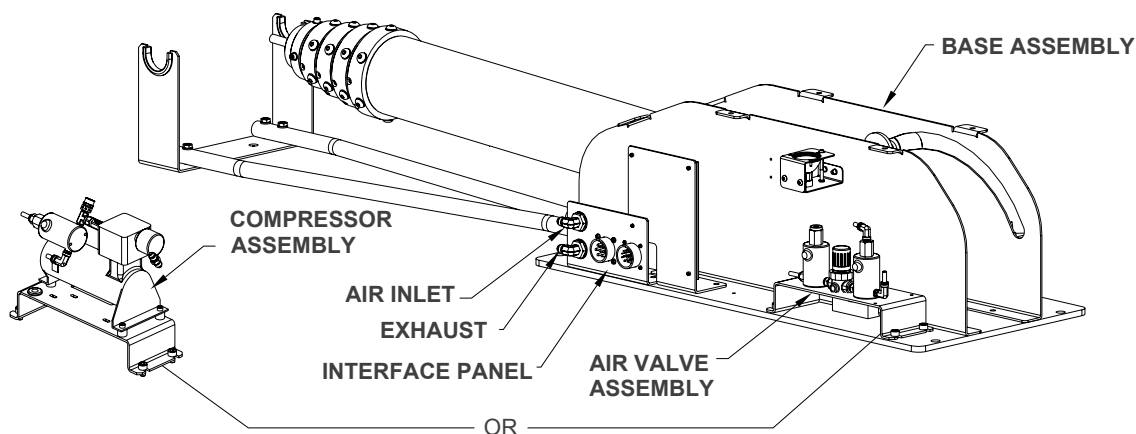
Base with Valve Assembly (optional Compressor also shown)
